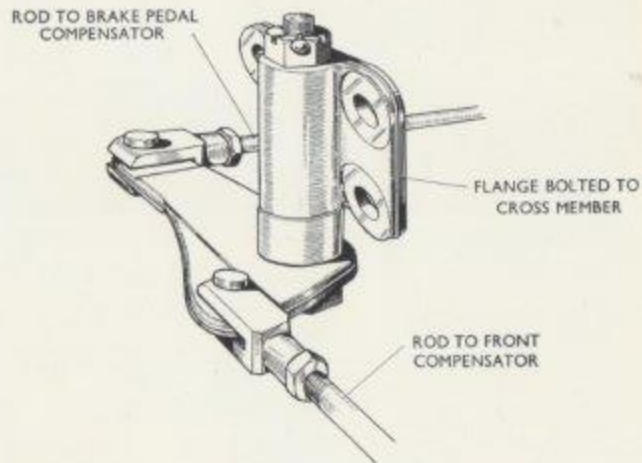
DETAILS OF PEDAL COMPENSATOR AND HANDBRAKE ATTACHMENT LANCHESTER 10
